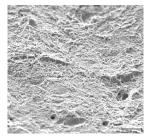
Areas of fracture surface of S1T4 showing ductile dimples mixed with facets.
